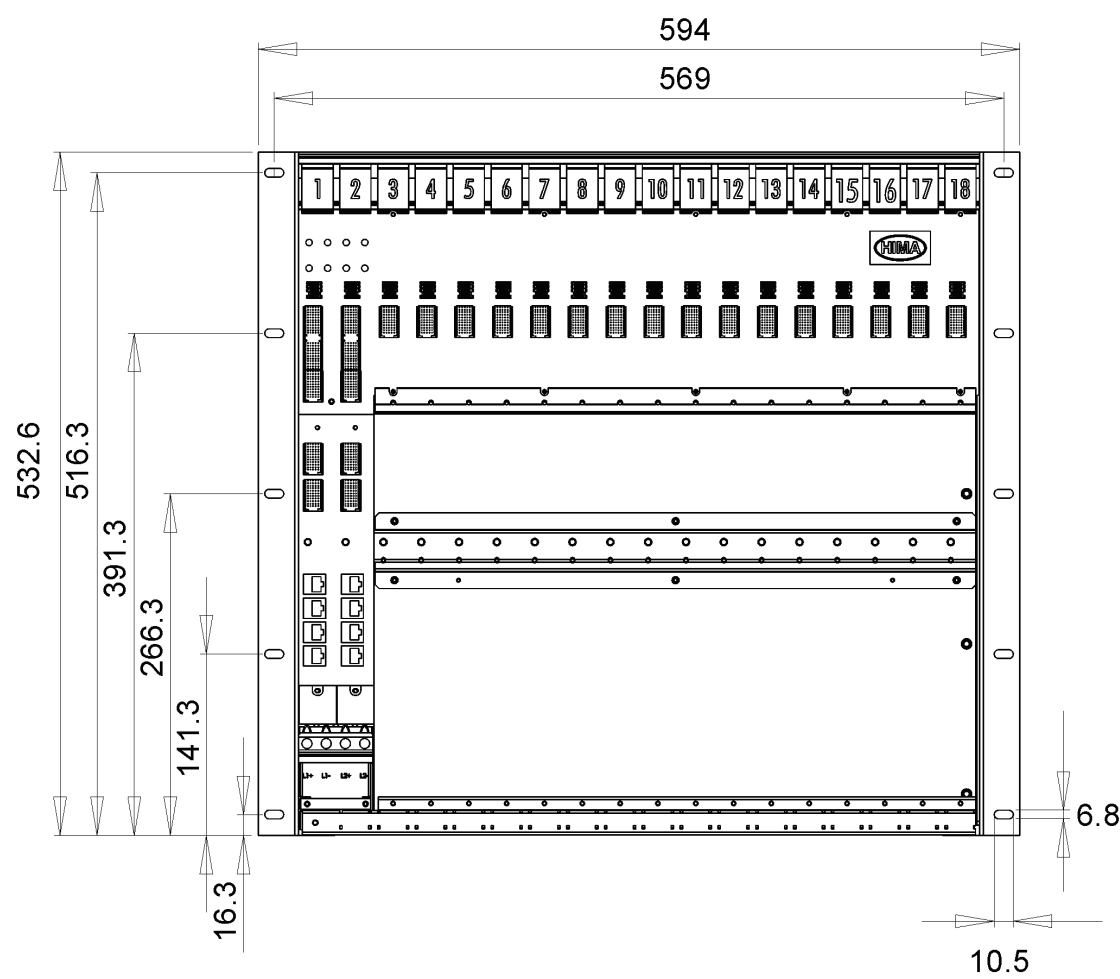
Dimension Drawing of X-BASE PLATE 18 31
